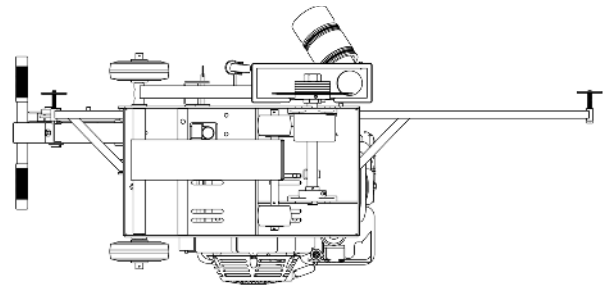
Alignment of blade and the pointer wheels - JS bottom view
